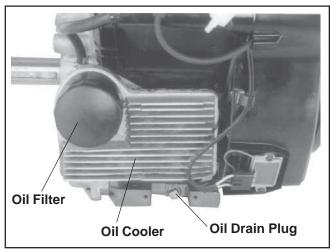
Oil Drain Plugs, Oil Filter, and Oil Cooler (Crankcase Mounted).
